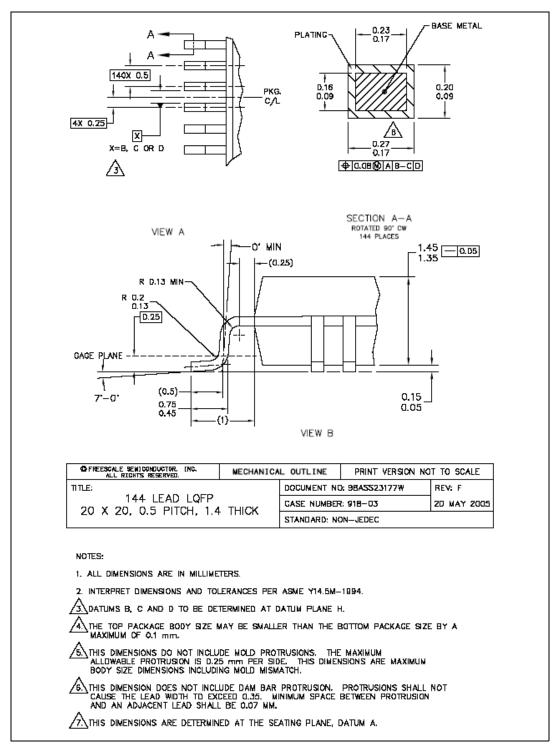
144 LQFP package mechanical drawing (Part 2 of 2)
